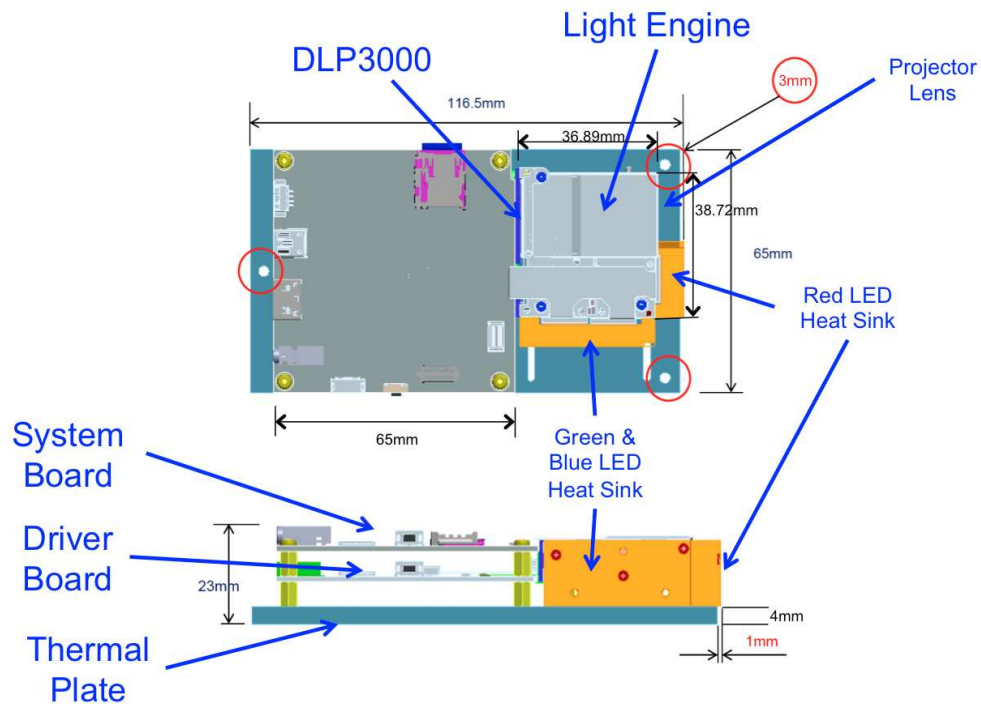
LightDLP® LightCrafter™ Crafter Module Dimensions
